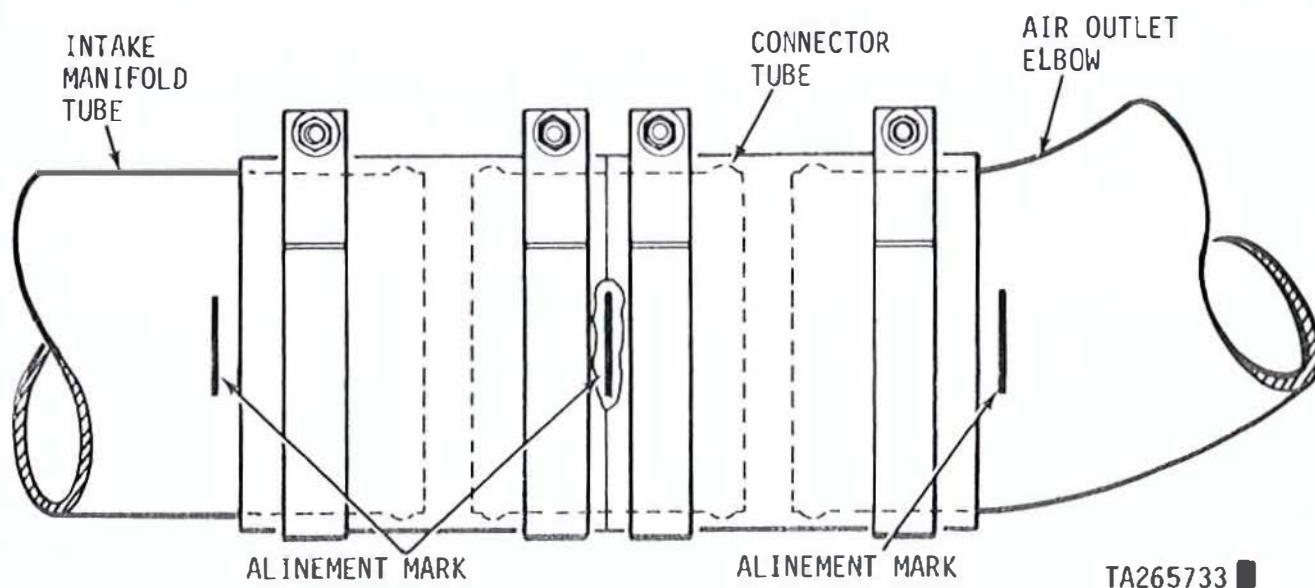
Alinement of intake manifold tubes and hoses.
